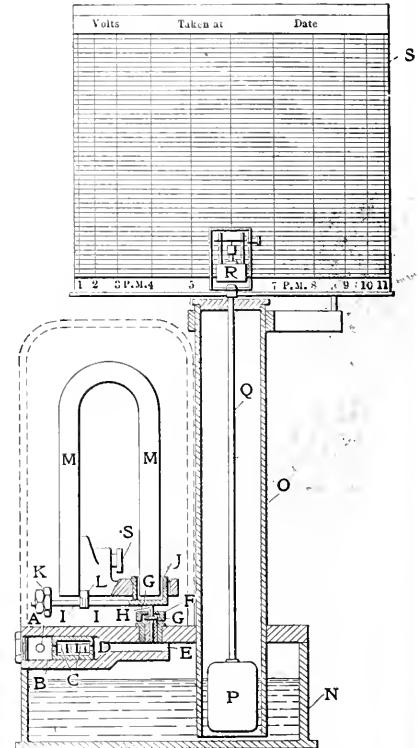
CONSTRUCTION OF COLUMN TYPE METER
